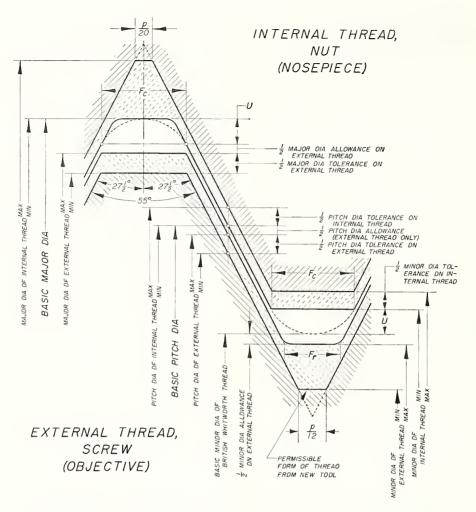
Disposition of tolerances, allowances, and crest clearances for 0.800-36AMO thread.
